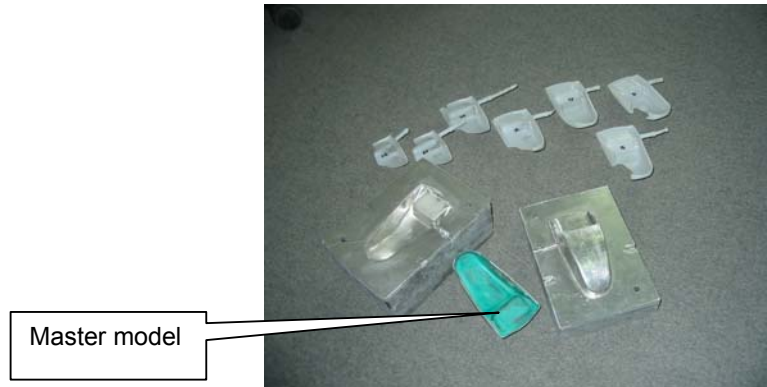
Semi-moulds manufacturing by Metal Spraying techniques [4]
